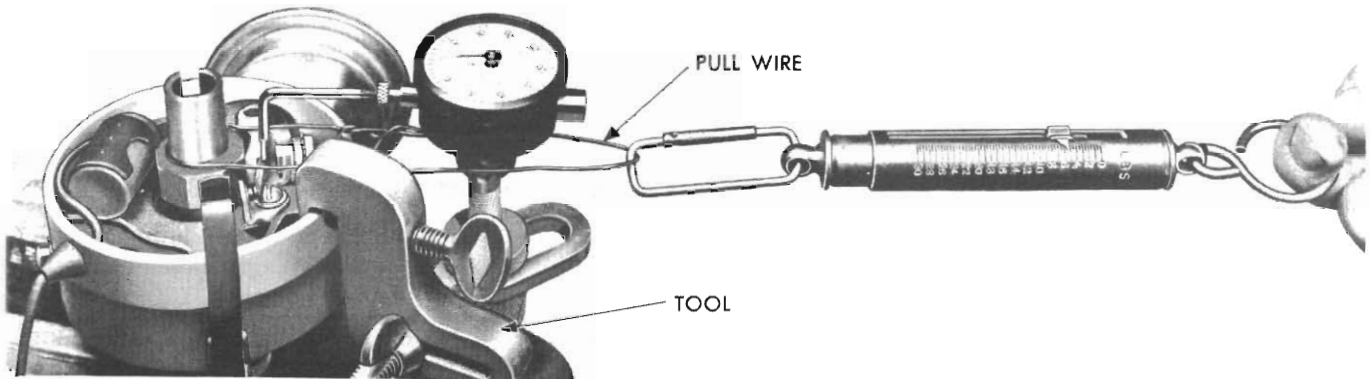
Shaft and Bushing Wear Test (typical view)
